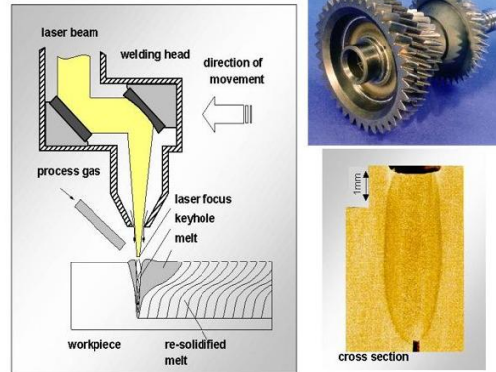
Deep penetration welding in automotive applications (courtesy Daimler-Chrysler)
